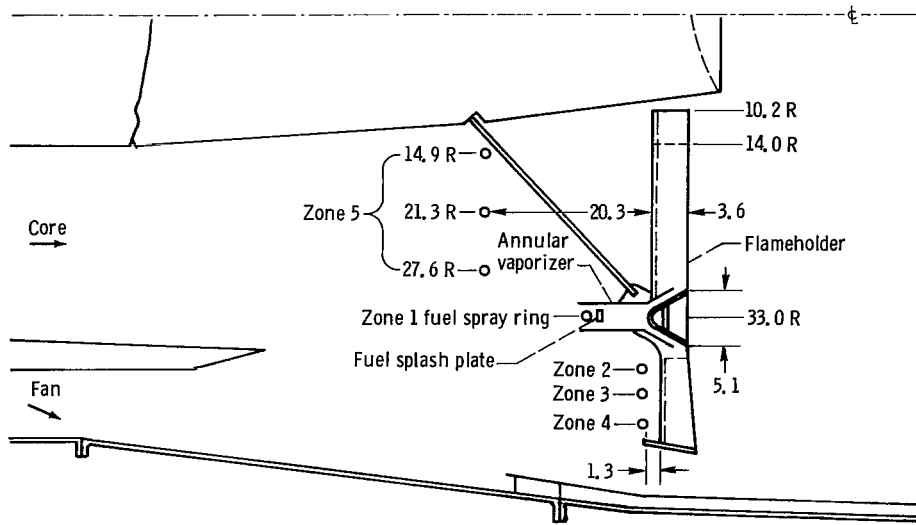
Carburetted flameholder I. Dimensions in centimeters.
